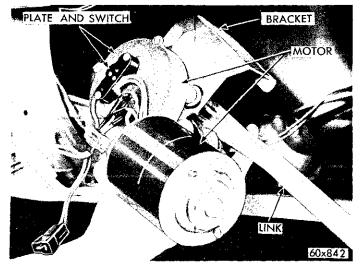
Removing Windshield Wiper Motor and Link Assembly (Typical)
